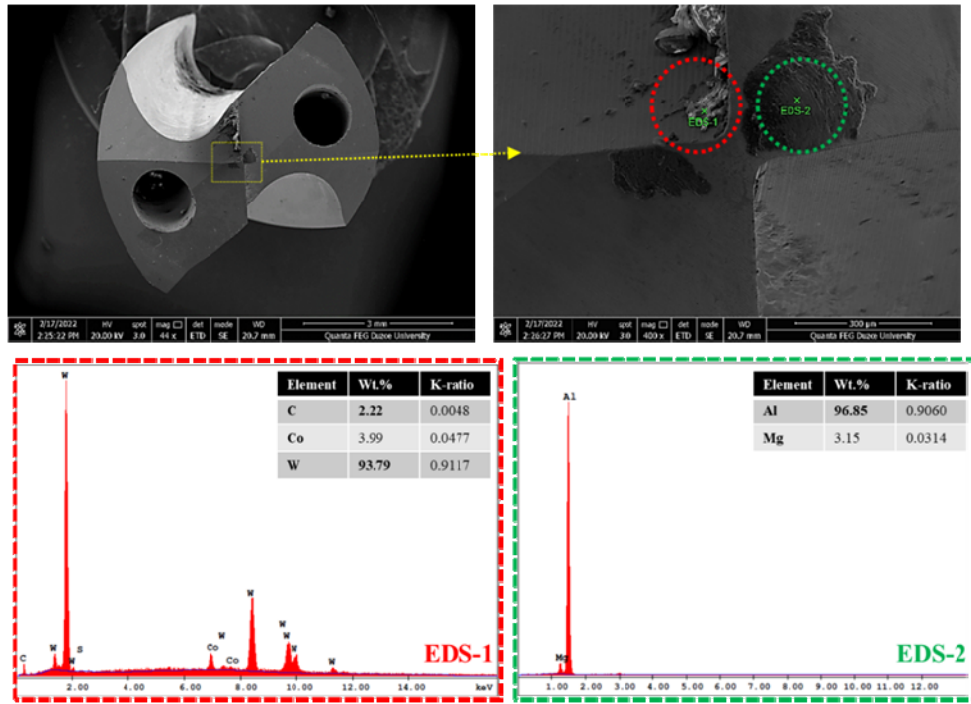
EDS evaluation of the elemental analysis of drill Tool 1 after drilling CARALL composite.
